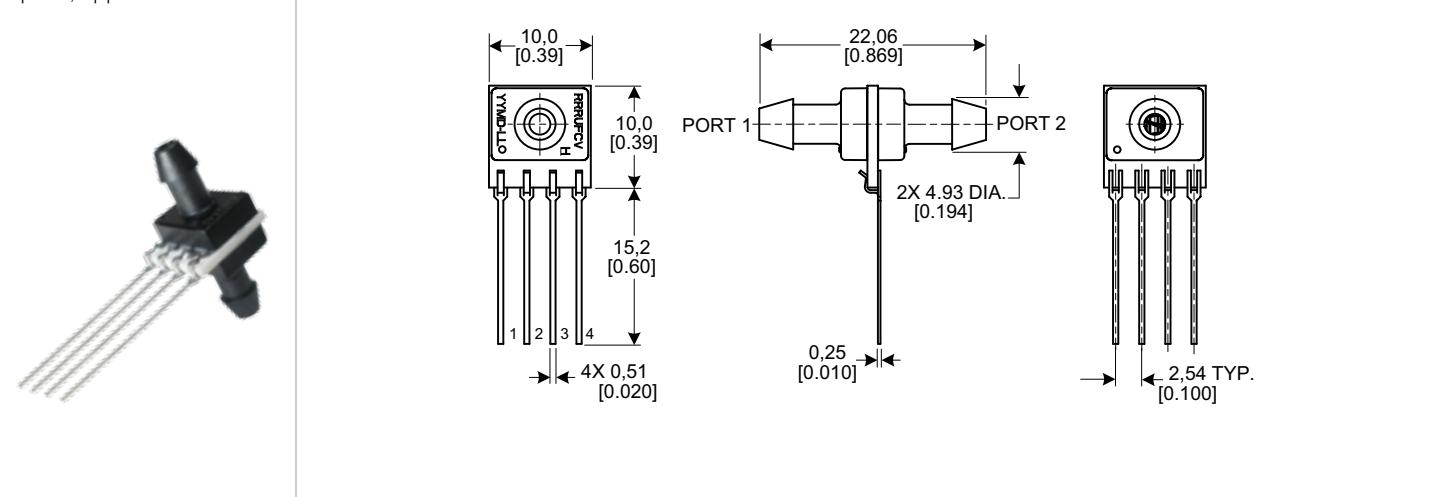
SIP Package Dimensional Drawings (For reference only: mm [in].)
